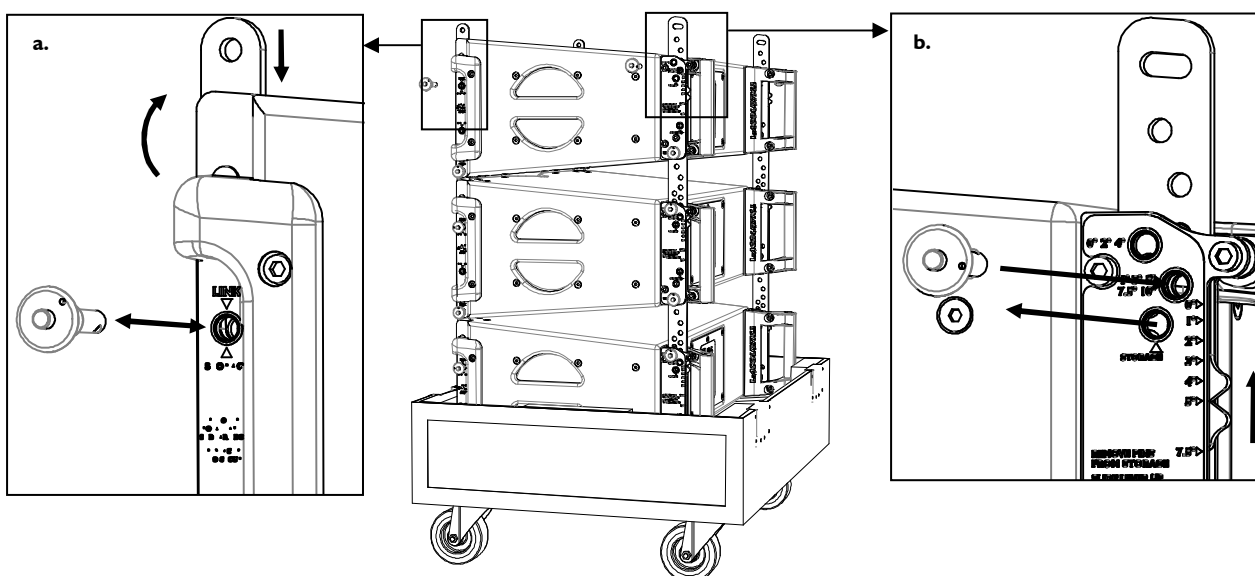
Checking the ARRAY#1 inter-enclosure attachments
